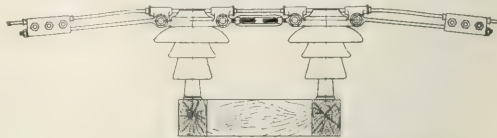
CLAMP FOR HIGH-TENSION LINES
